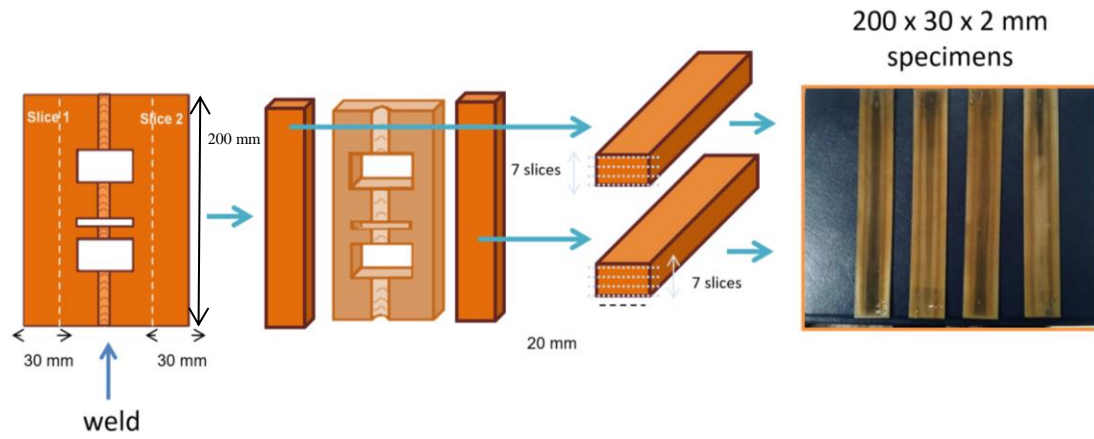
SA508 strip specimen extraction from a welded specimen.
